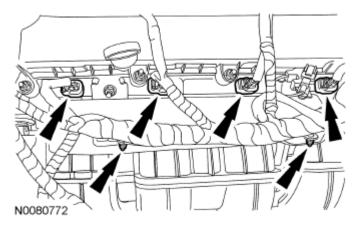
Locating Fuel Injector Electrical Connectors And Wiring Harness Retainers Courtesy of FORD MOTOR CO.
